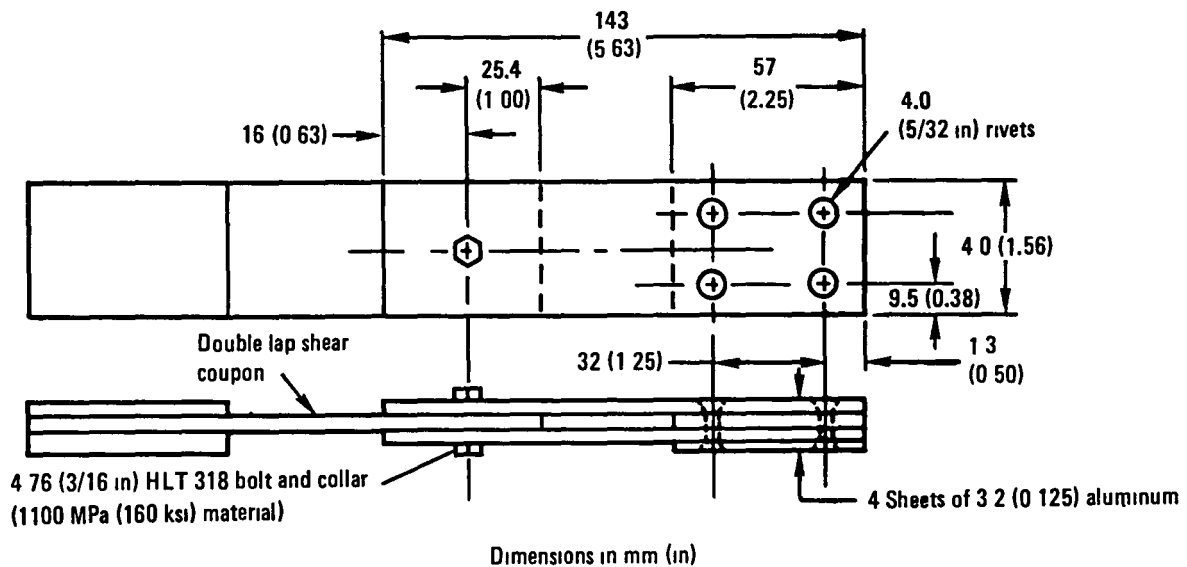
Double lap cylindrical shear bearing specimen - single bolt.
